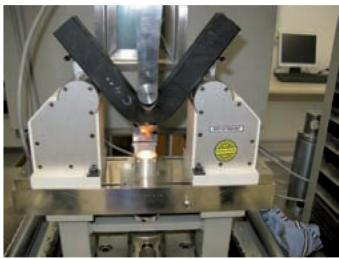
Technological bending test according to DVS 2203-5 to examine the welding seam quality
